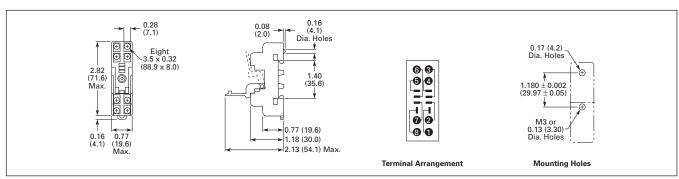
D4PA2 — Approximate Dimensions in Inches (mm)
